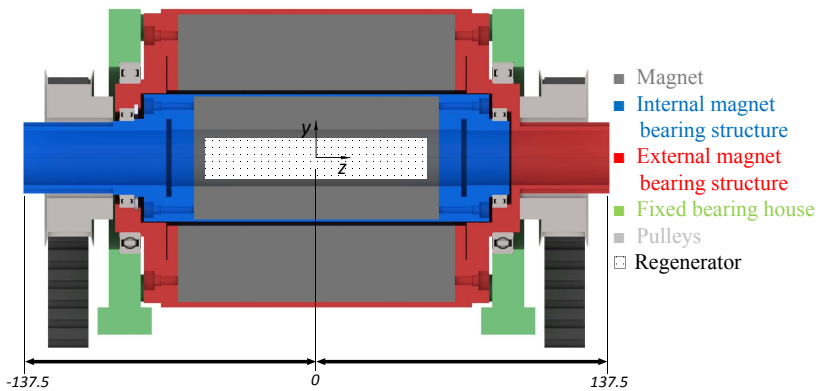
$y-z$ cutaway view of the NHC design showing the bearing structure to enable the counter rotation of the external and internal magnets. Dimensions in mm.
